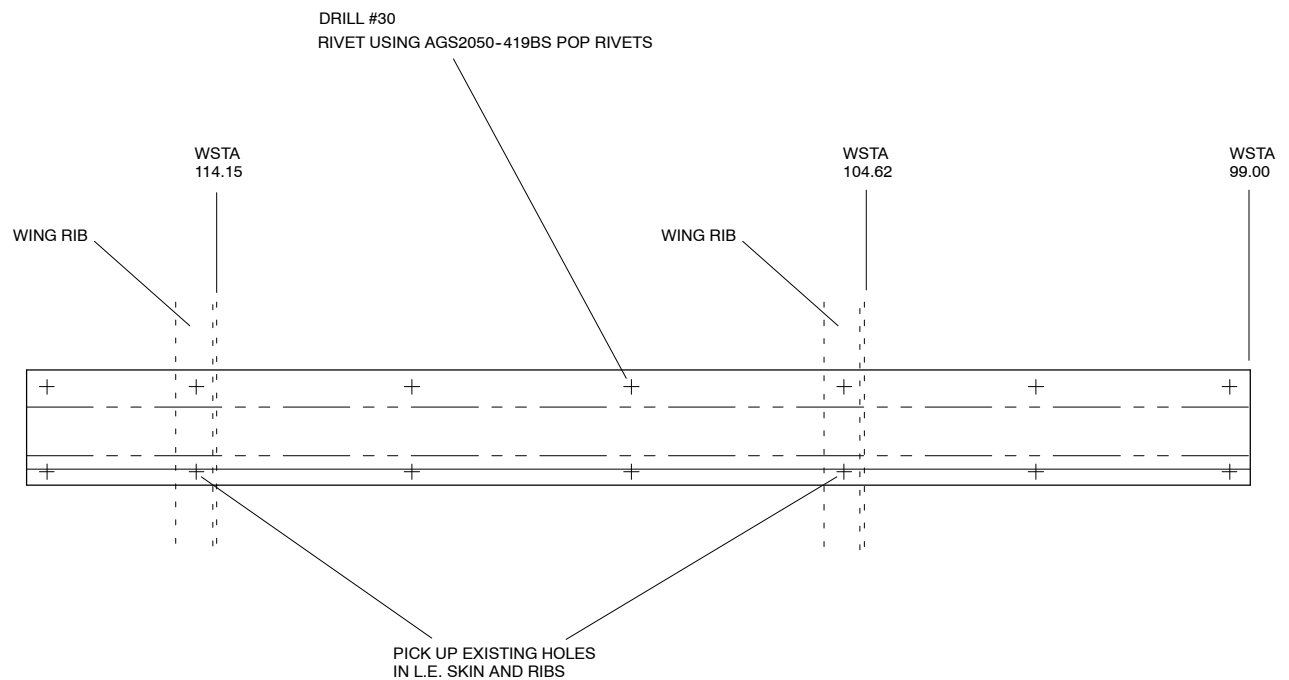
Detail of Stall Breaker Strip Attachment (RH Wing Shown, LH Similar)
